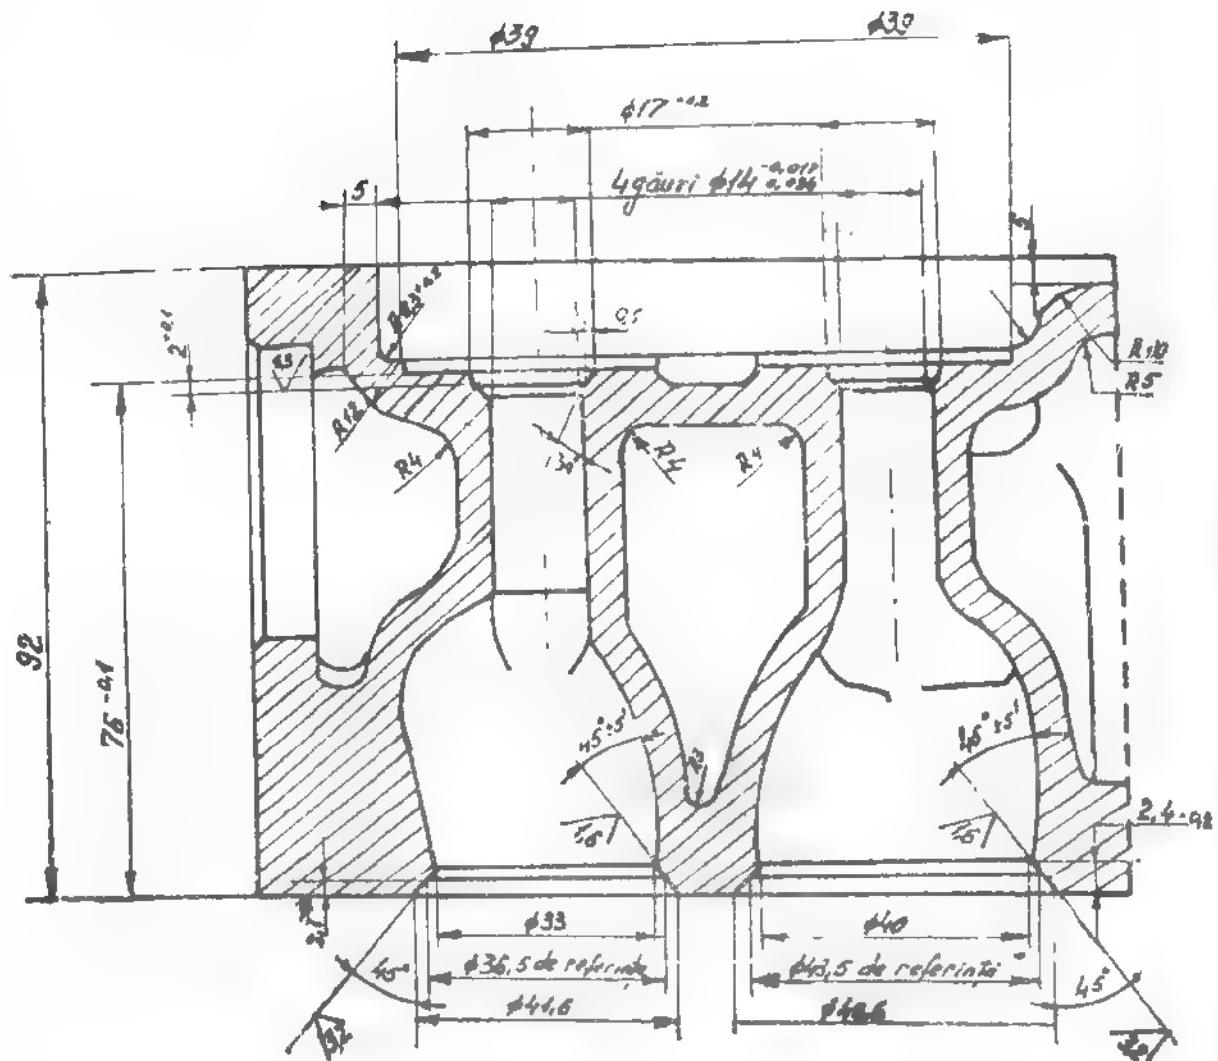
CYLINDER HEAD SIZES FOR THE VALVES
